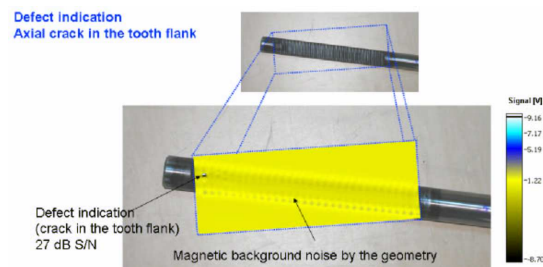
Crack detection in a pusher beam tooth flank by a GMR gradiometer array
